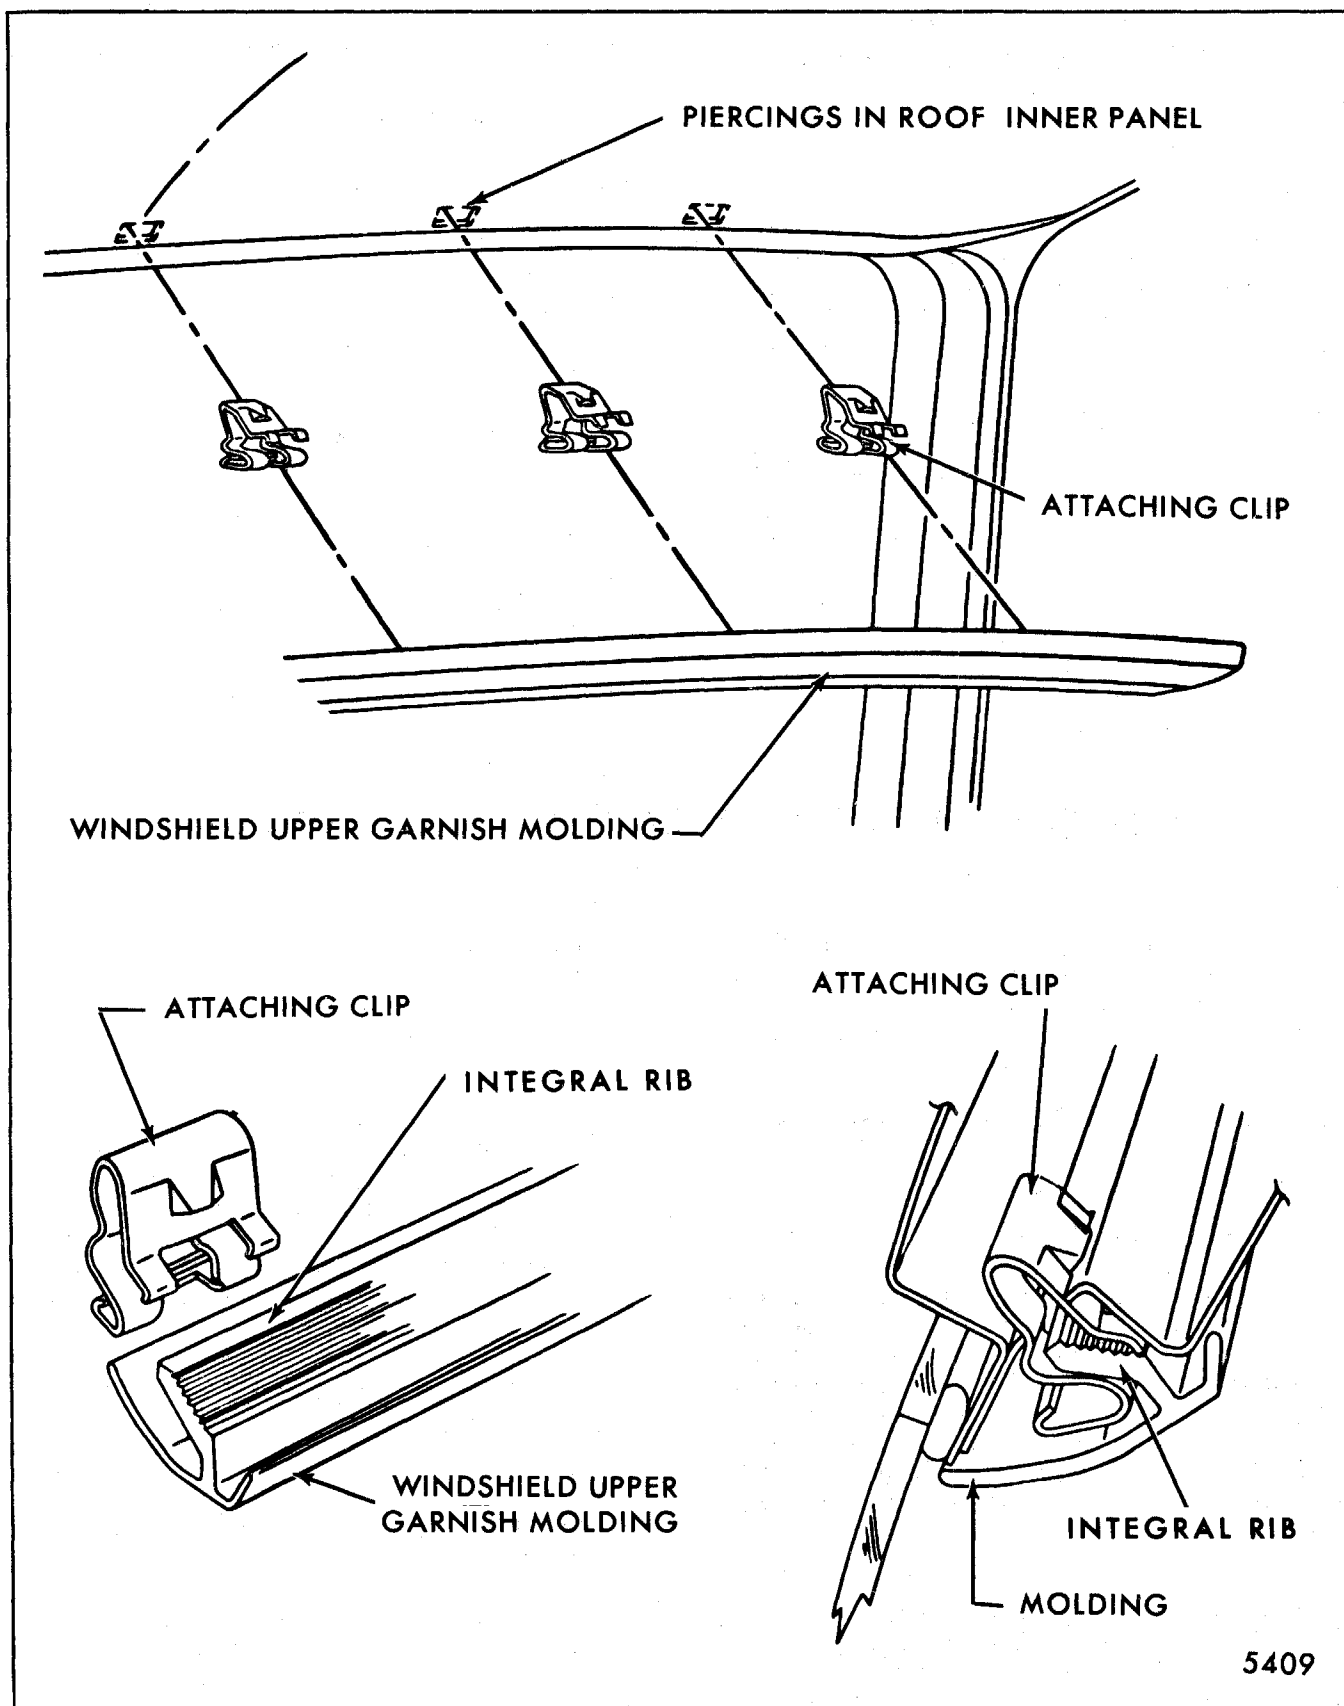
Windshield Upper Garnish Molding - "A" Styles
